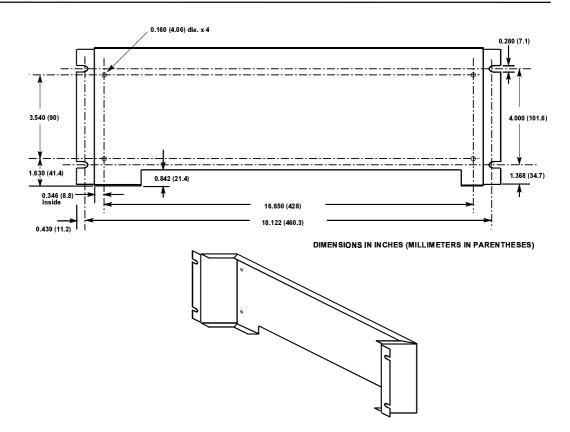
IC693ACC313 Recessed Mount Adapter Bracket
